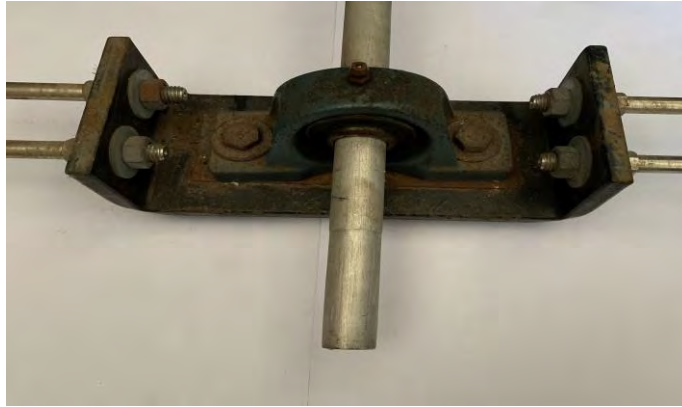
Mechanical support with mechanic bearing SKF [1].
